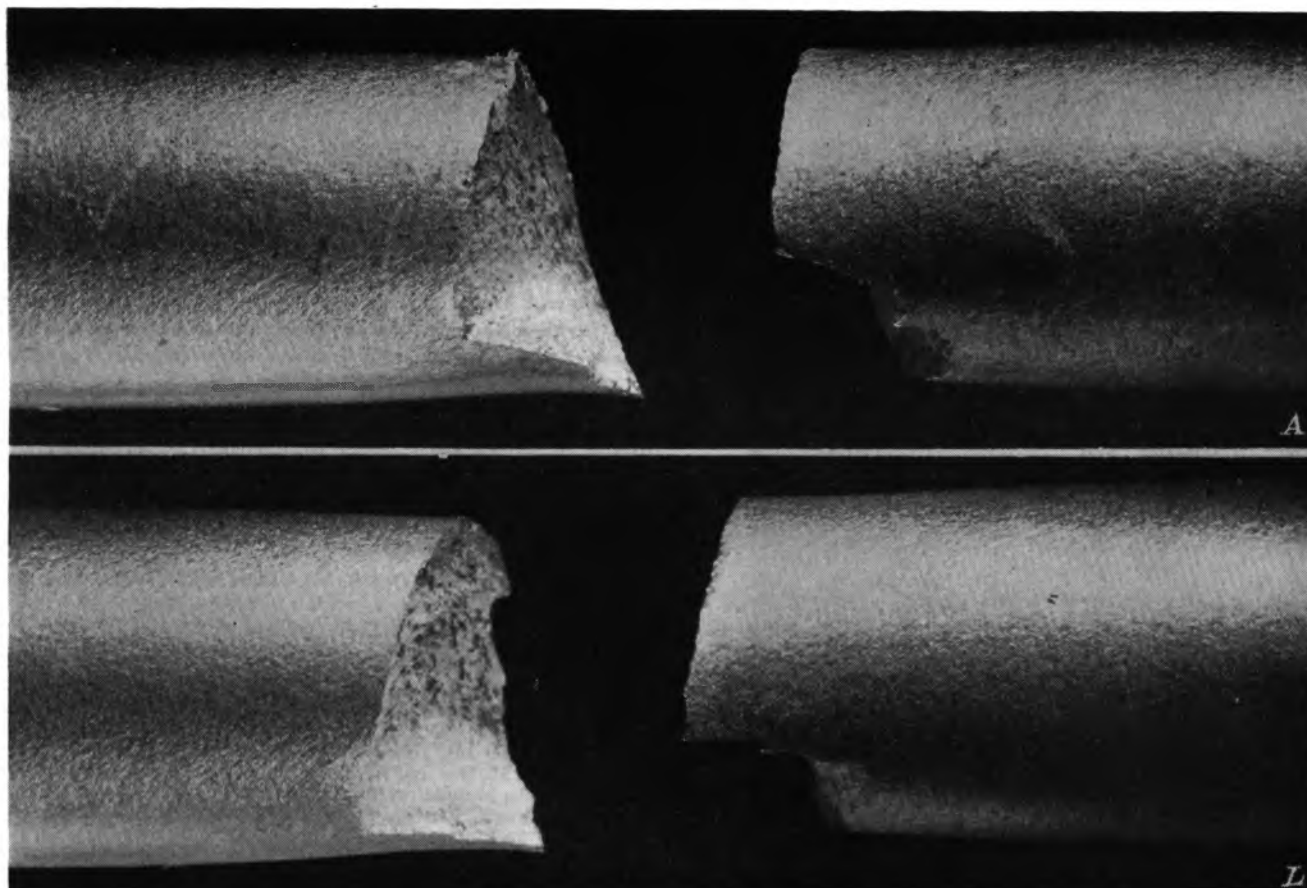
FRACTURE SURFACES RESULTING FROM TENSION AND TORSION LOADS
